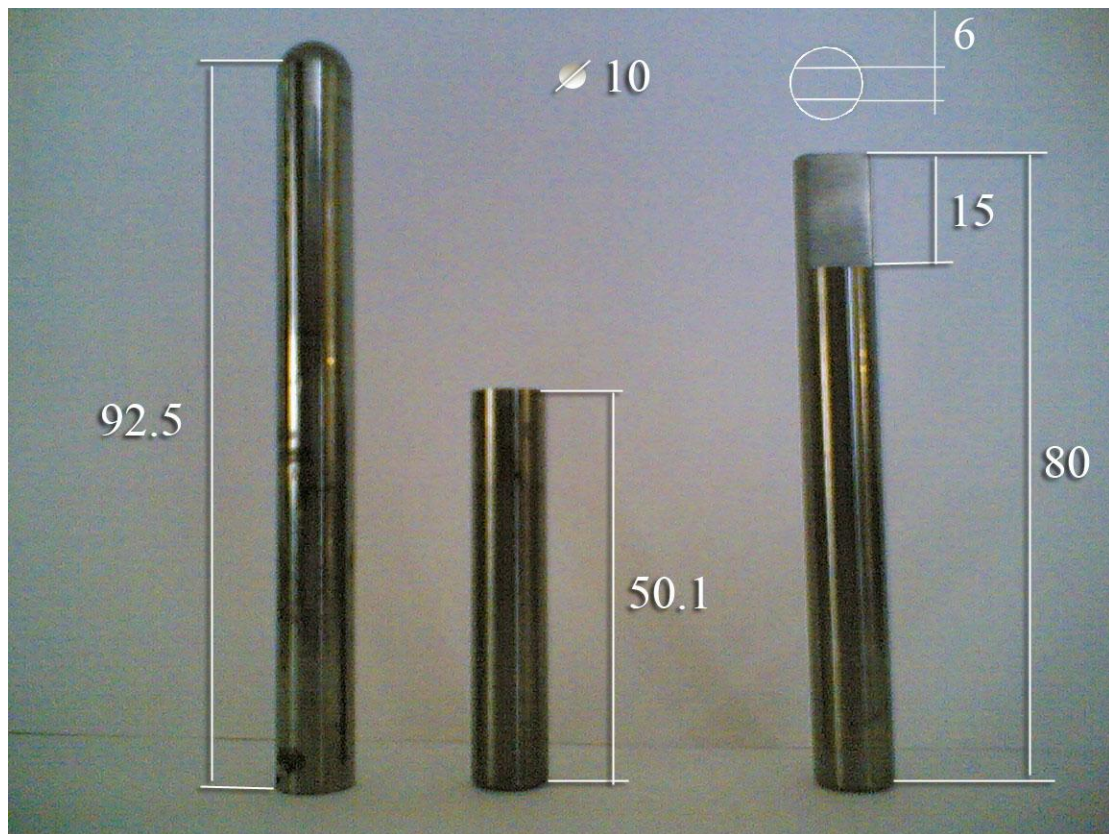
Used blanks and end-mill replacement and dimensions in mm.
